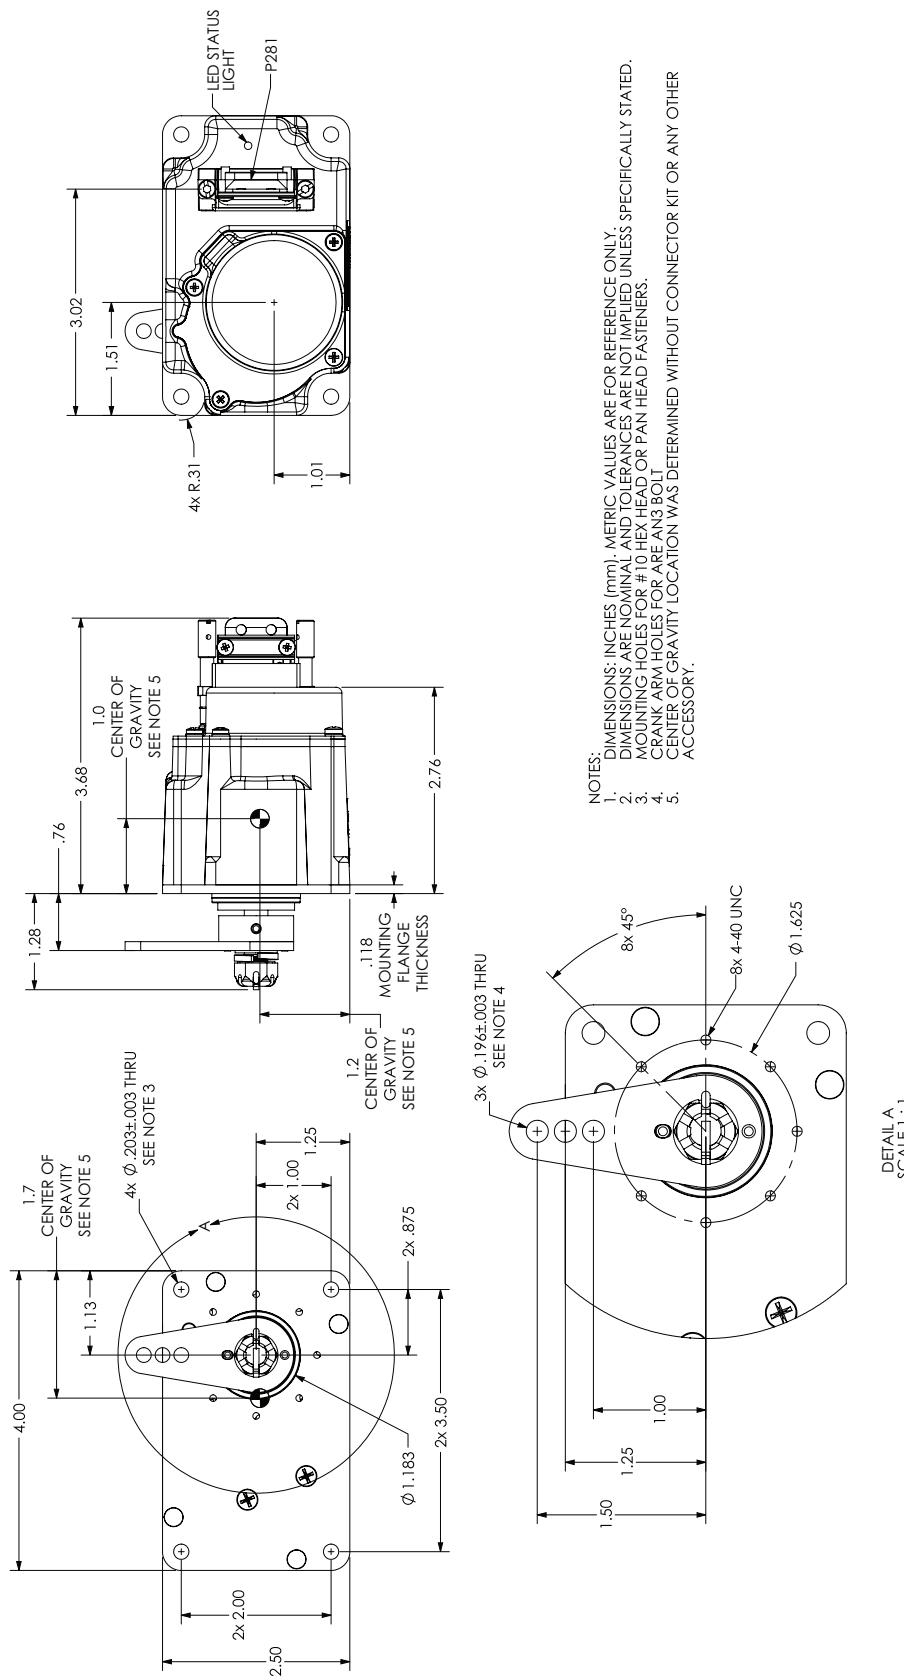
GSA 28 Outline/Installation Drawing 011-02927-00
